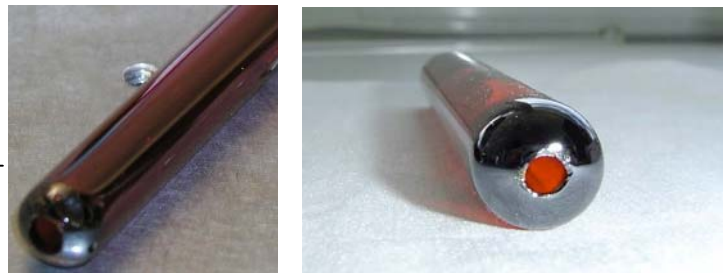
Chalcogenide glass tubes obtained by rotational casting
